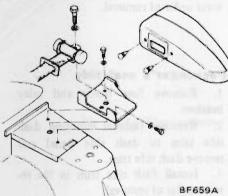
Removing shoulder belt (for S30 2 seater models)
